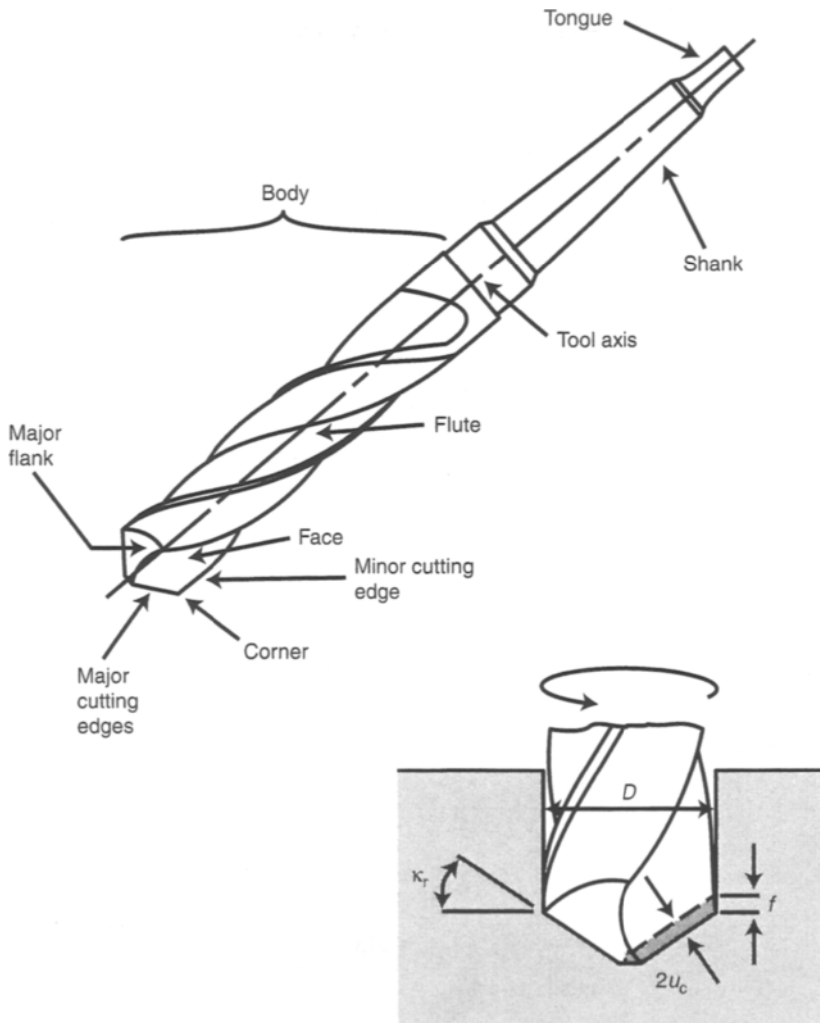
Geometry of twist drill and detail of the drill-workpiece interface.
